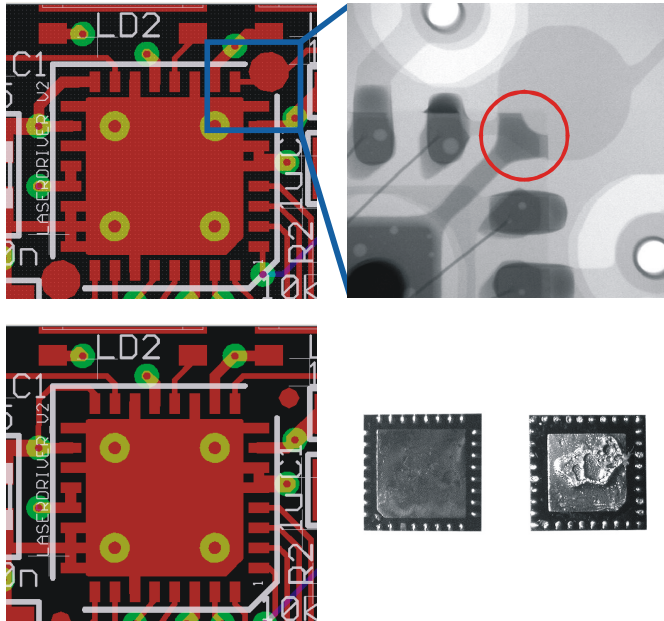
Top: Old PCB layout which led to shorts with the new Laser Driver package, as shown on the X-ray image to the right. Bottom left: Redesigned PCB with cleared corners. Bottom right: solder side of old (left) and new (right) Laser Driver ASIC package.
